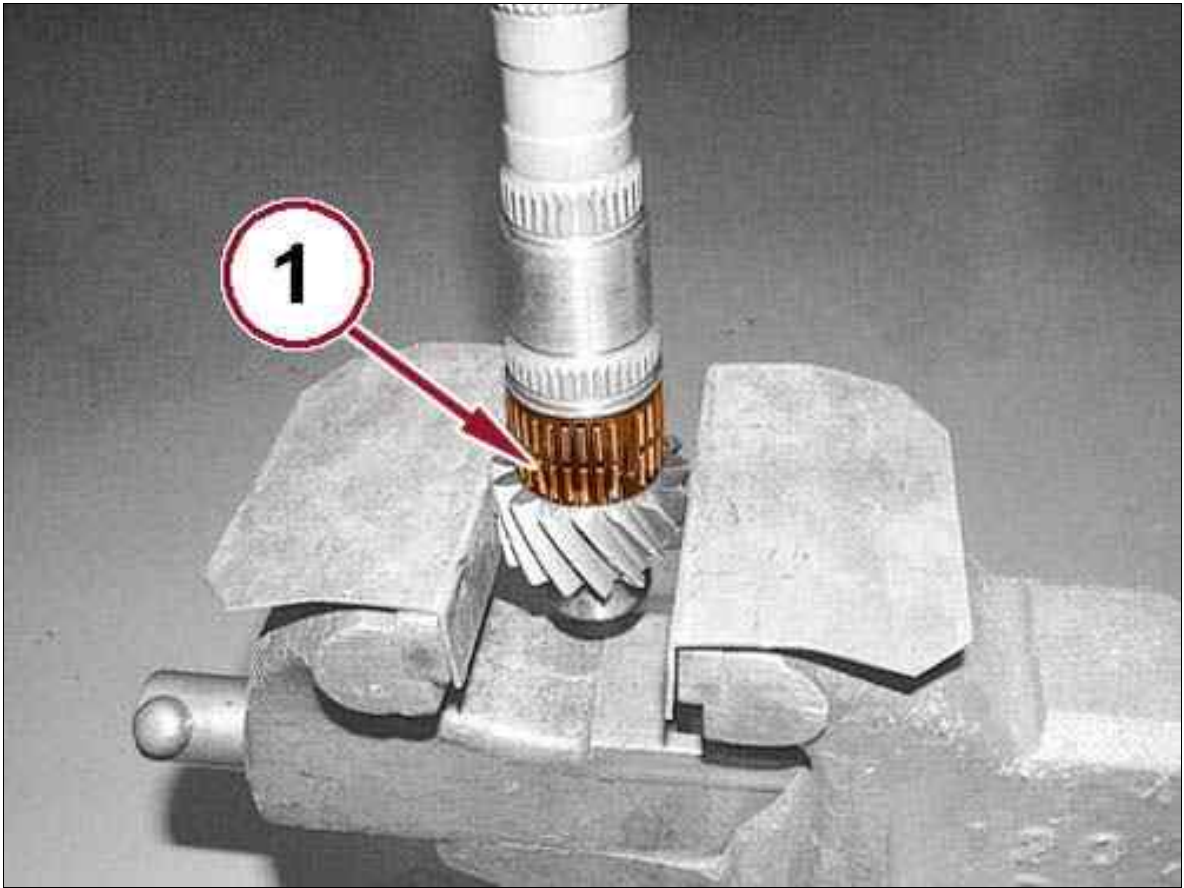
1st-2nd Reverse Synchronizer Hub, 1st Gear Synchronizer Ring & 1st Gear Driven Gear & Special Tool
